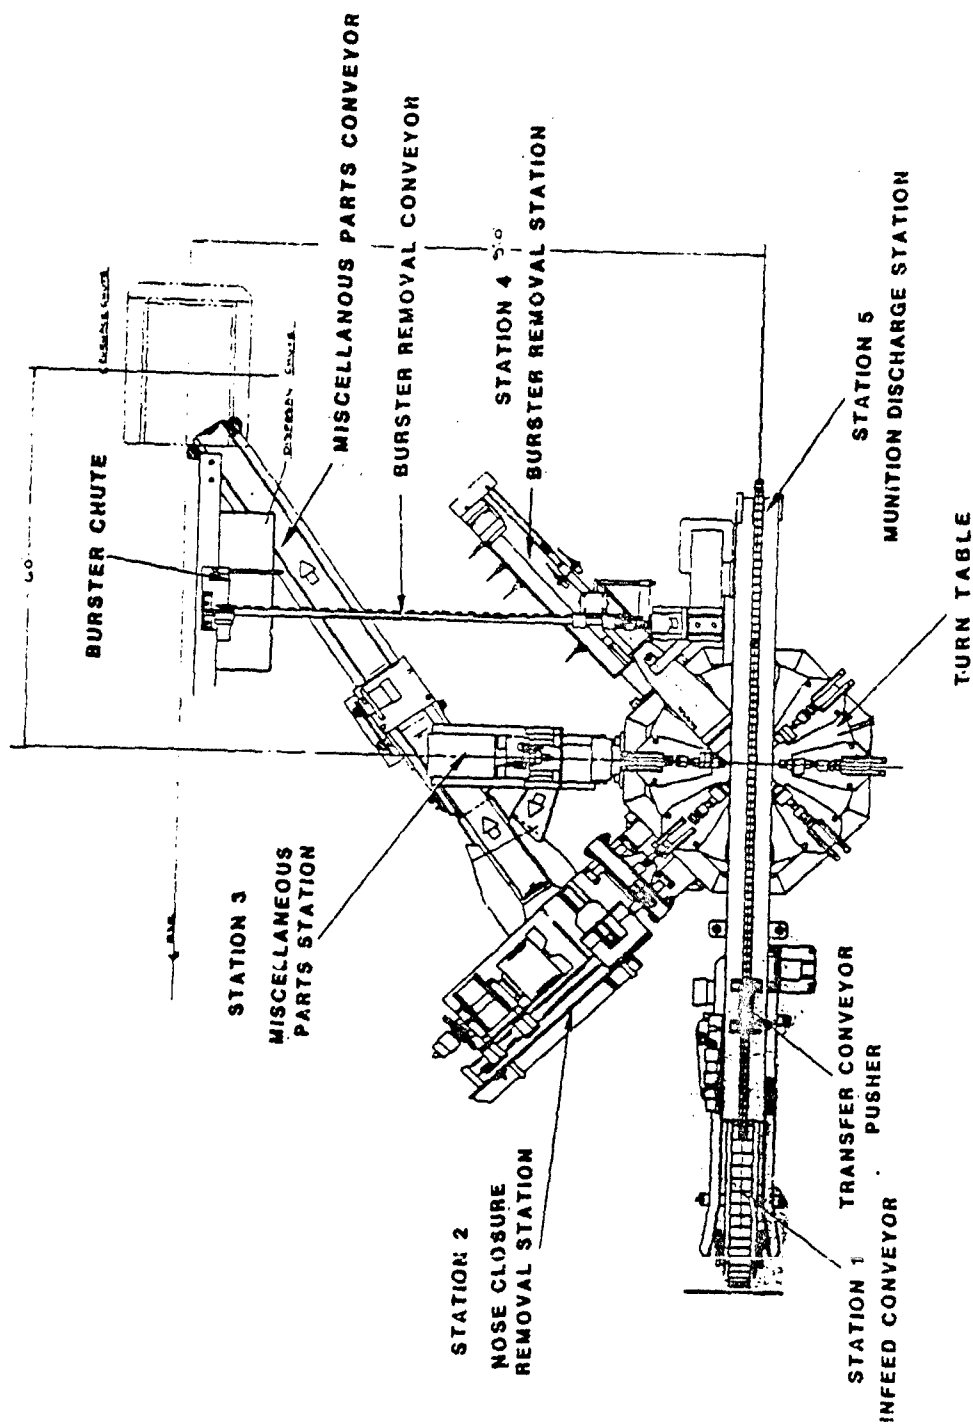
PROJECTILE MORTAR DISASSEMBLY MACHINE (PMD).
